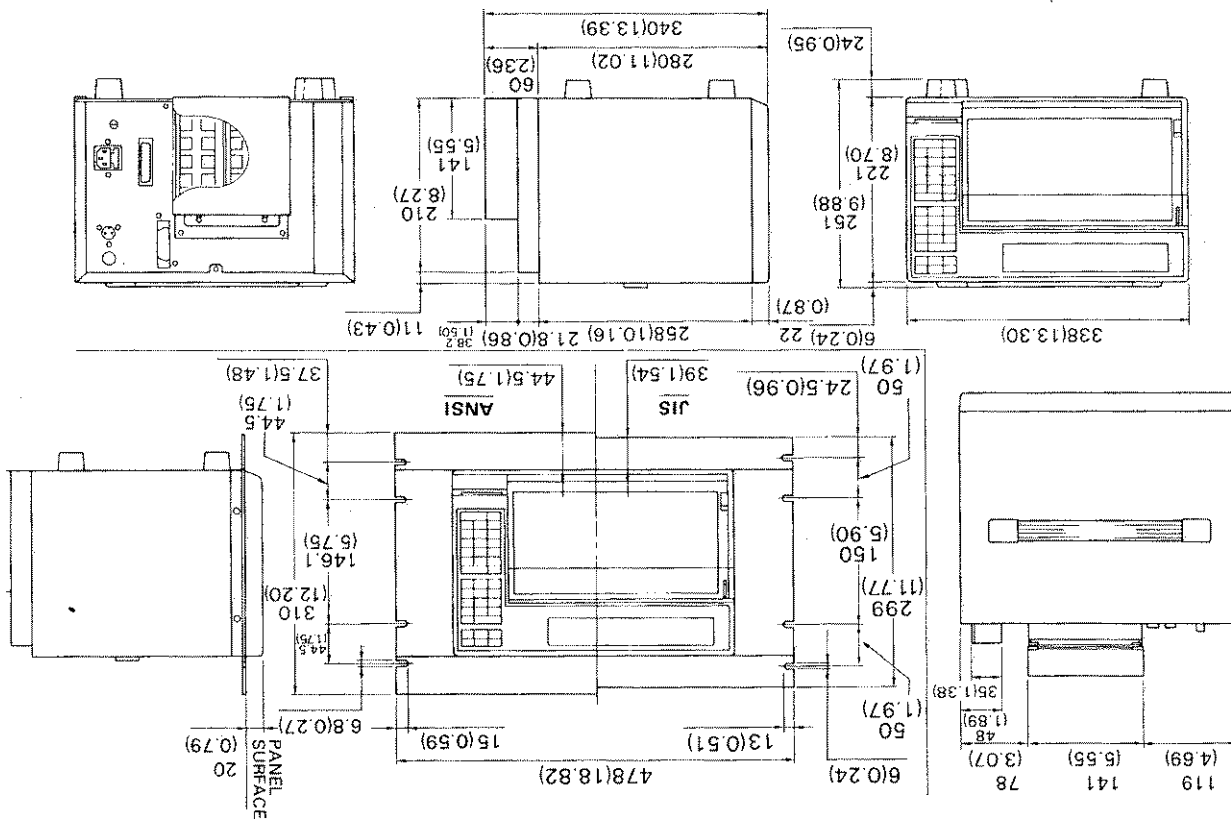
HRI300 External Dimensions and Rack Mounting
